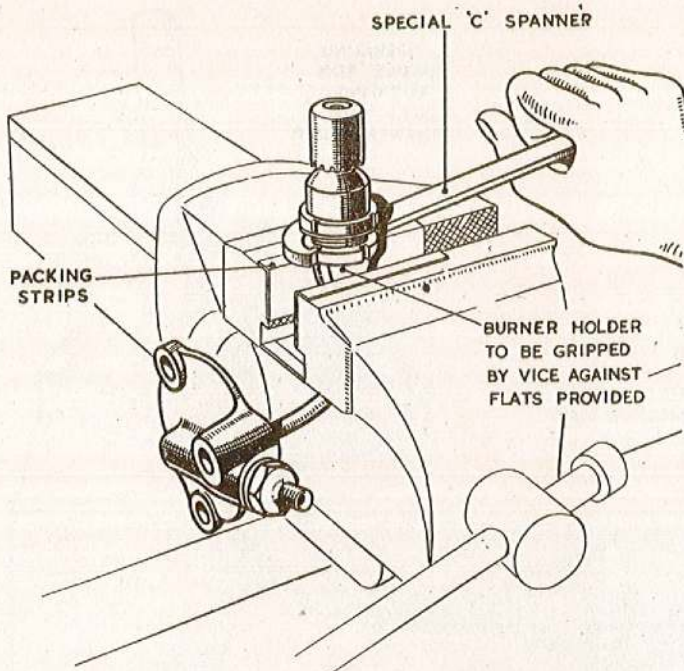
View showing method of mounting burner in vice and use of special "C" spanner
